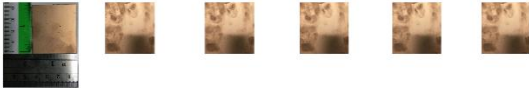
PCB size 1.5x1.62 inches before corrosion.
